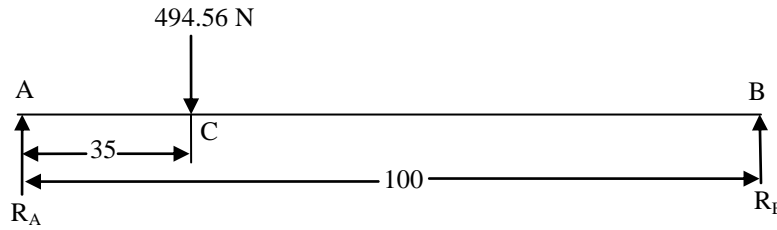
Load diagram of rotating shaft of the magnetorheological honing tool.
